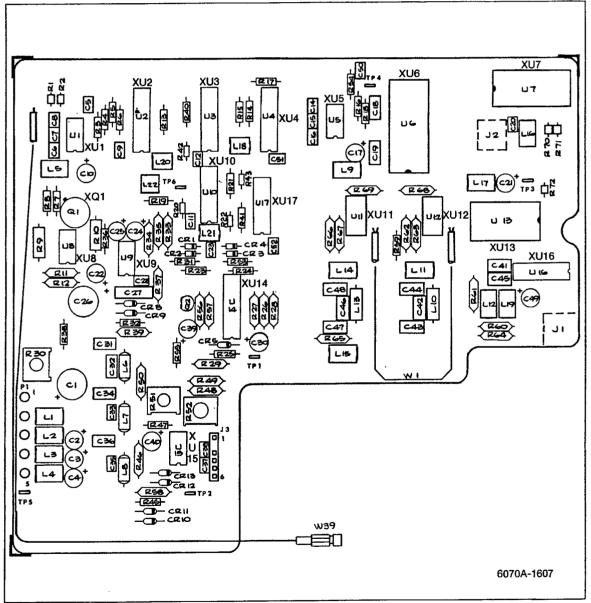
A3A6 Single Sideband Mixer PCB Assembly
